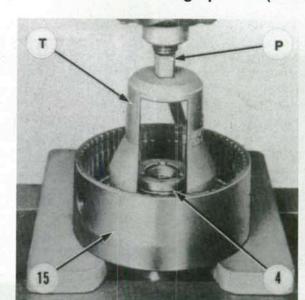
Use Ford tool No. 1312, or other suitable horseshoe shaped tool, to compress piston return spring so snap ring (4) can be removed.
